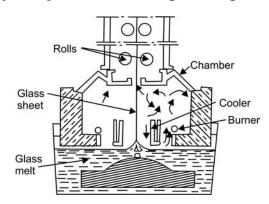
Machine for Vertical Drawing of Glass
